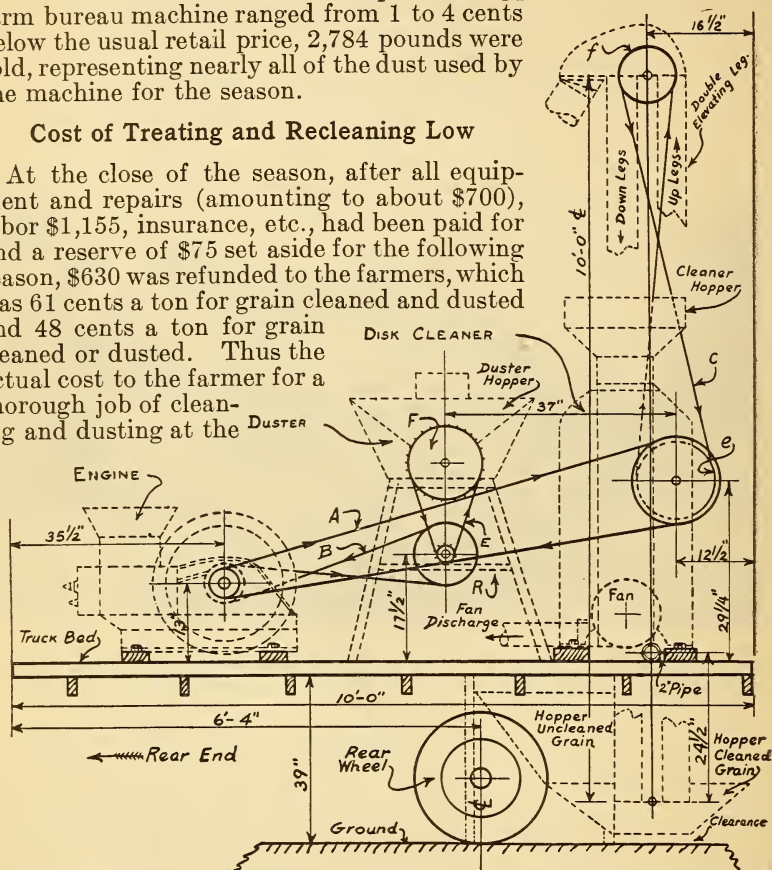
Side view of the power-driven combination grain-cleaning and copper-carbonate dust-treating machinery installed on an automobile truck. Belt A is the main driving belt for operating the cleaner. Belt B operates the dusting machine. Belt C, located on the opposite side, drives the double elevator leg.
